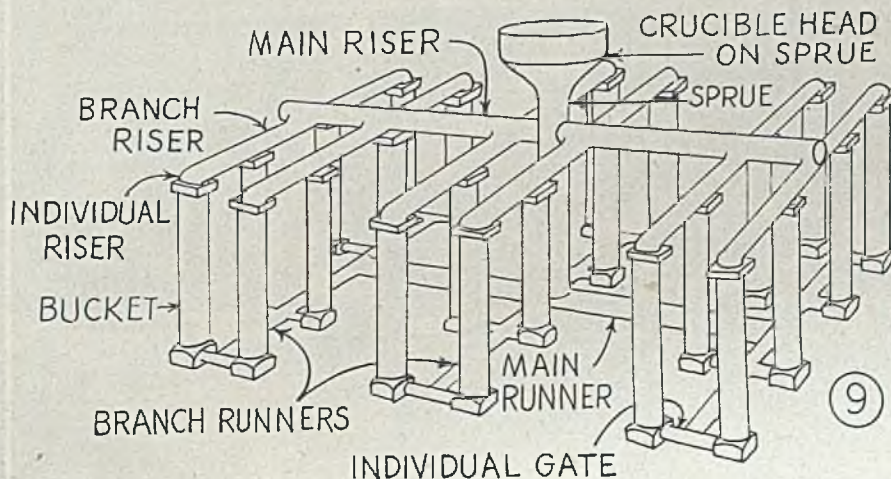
Here is diagram indicating arrangement of bucket groups, risers, runners and sprue assembled for the casting of 24 buckets
